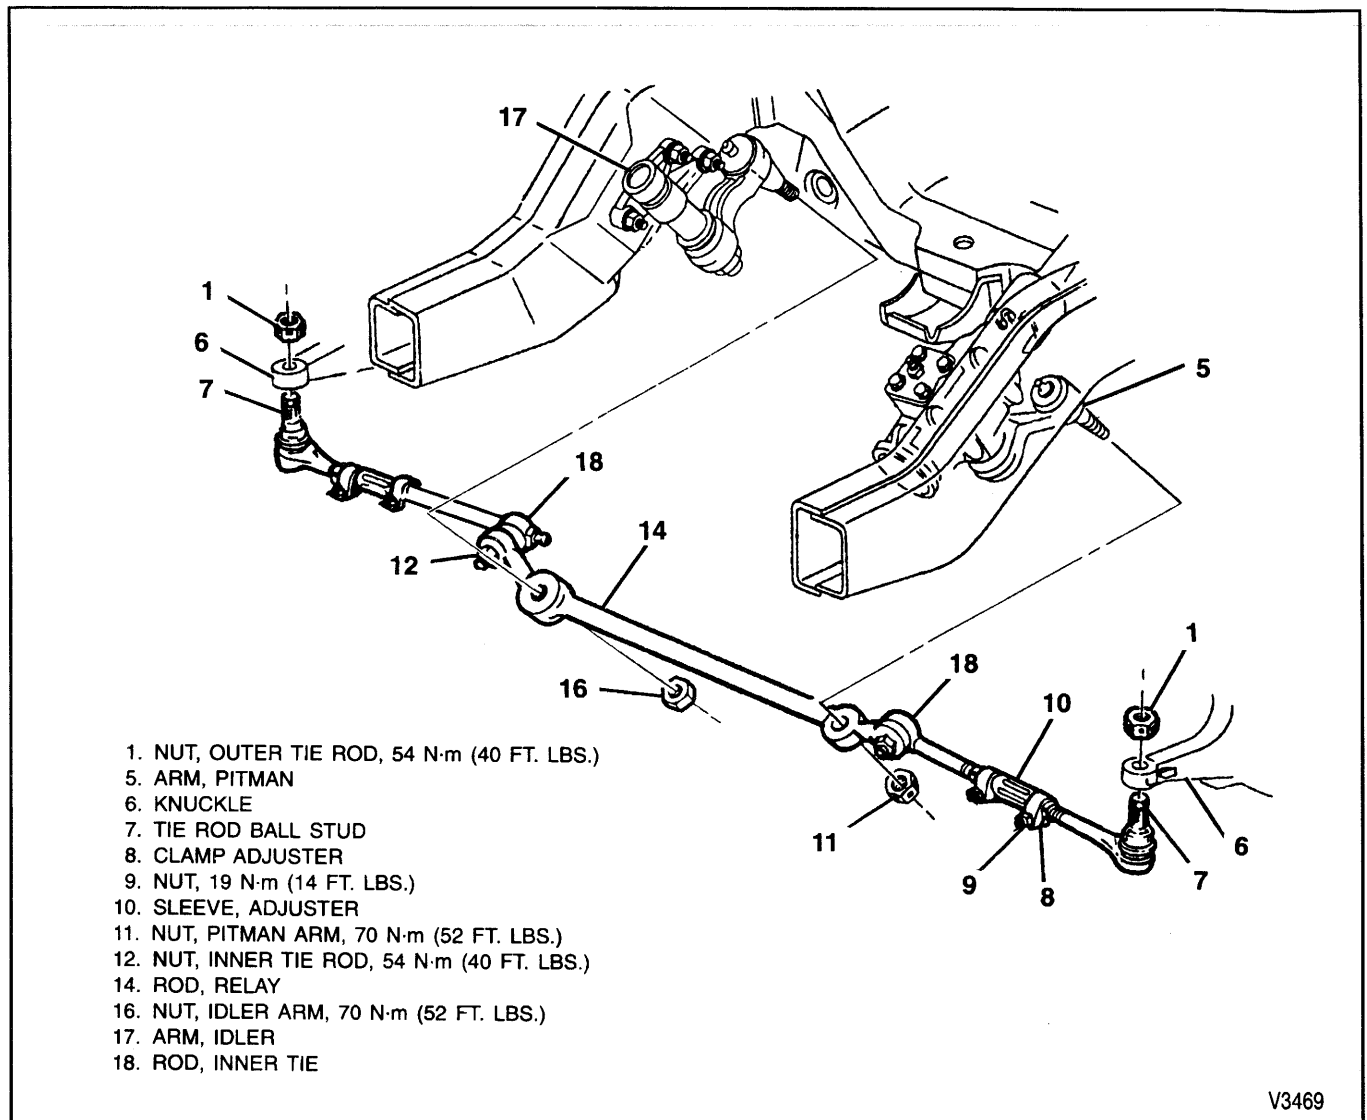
Steering Linkage—Two Wheel Drive (C-Models)
